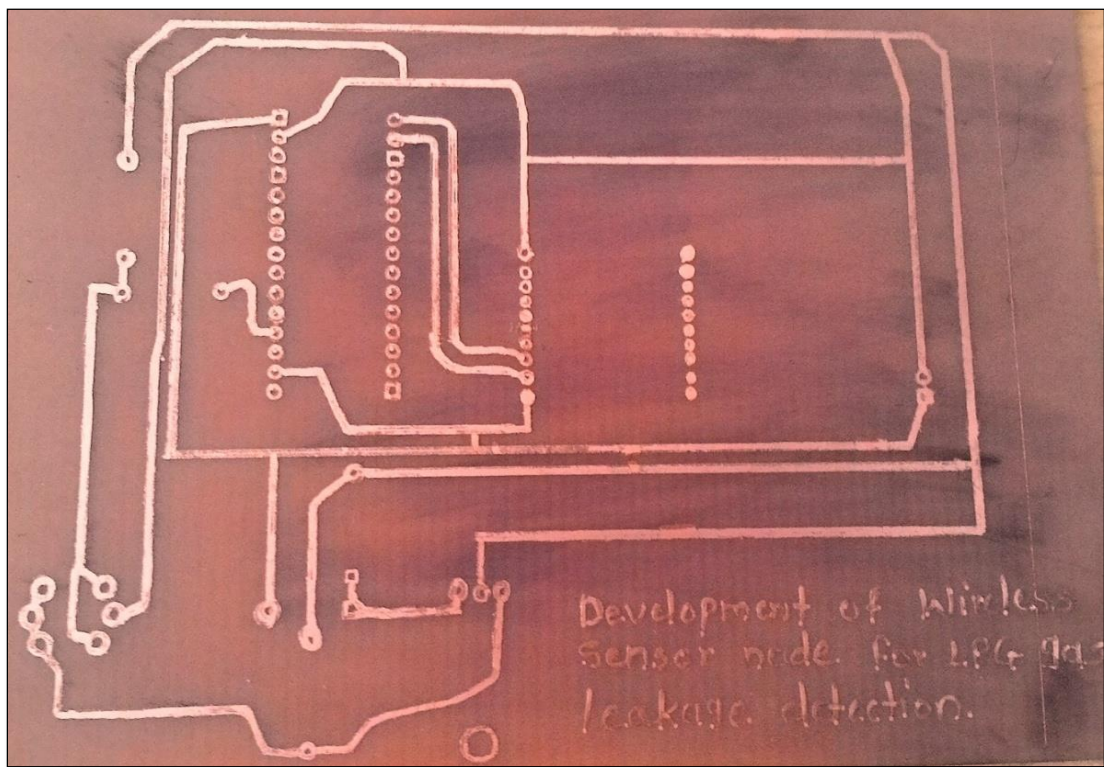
b) PCB layout of a wireless gas sensing system.
